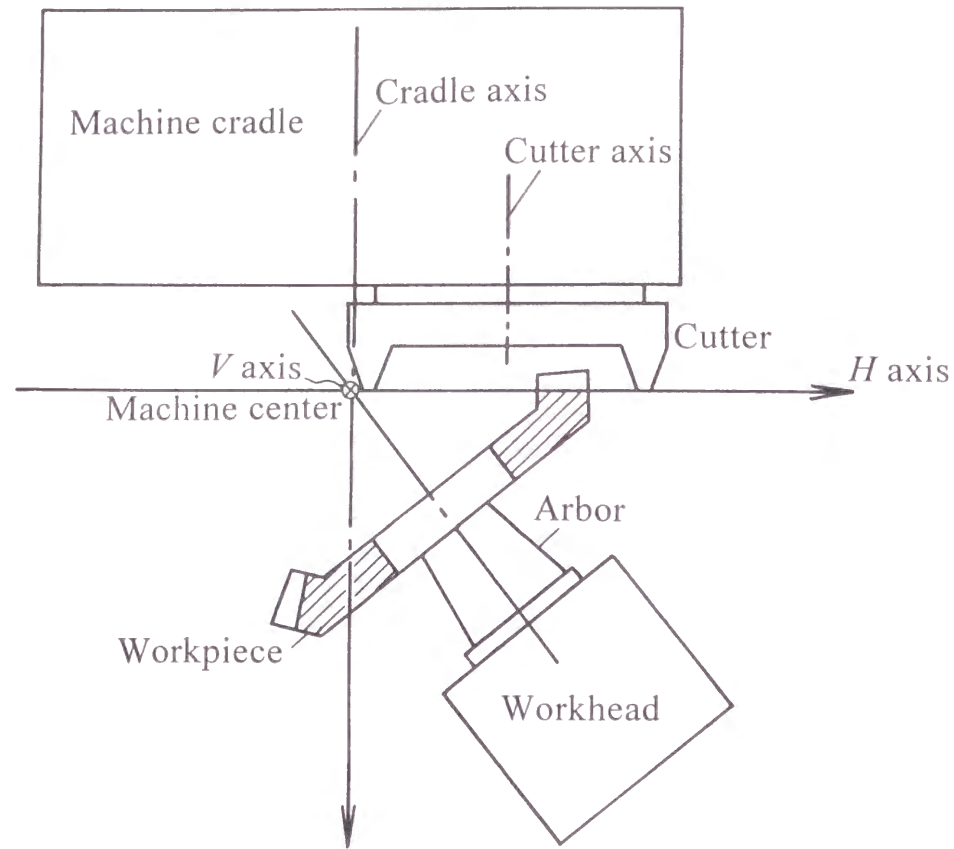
Basic machine setup of hypoid face-mill generator
